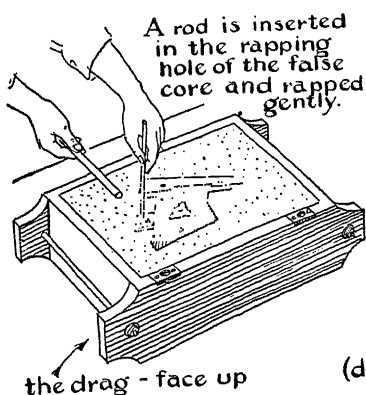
(continued) Sand casting. Removing the false core and filling the cope.
